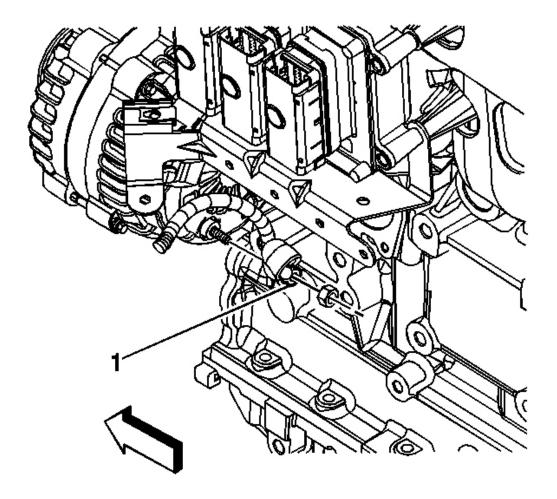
Rear Of Generator (Alternator) View Courtesy of GENERAL MOTORS CORP.
